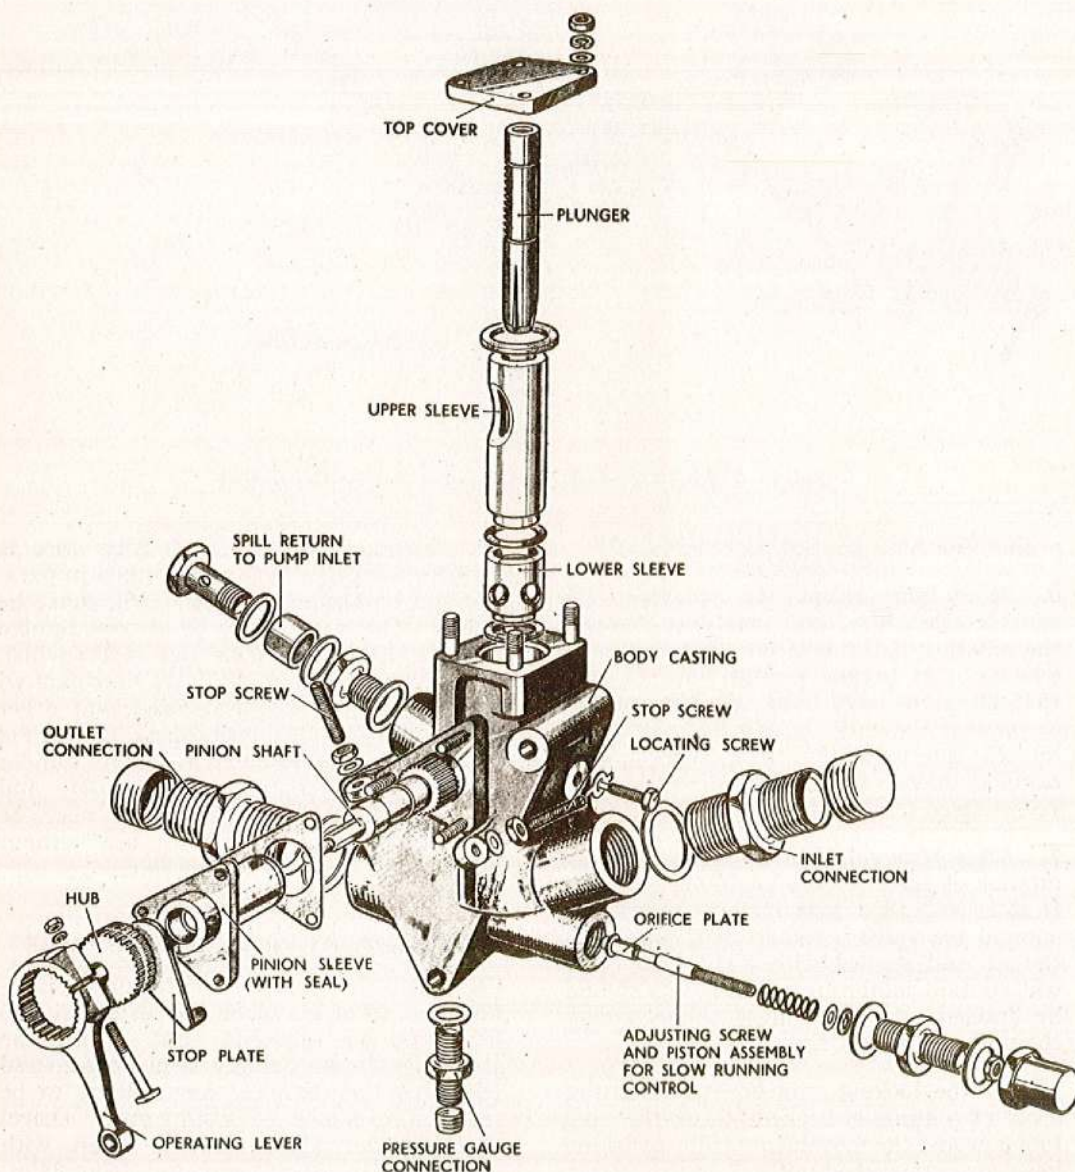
(a). T.V.B.1/4D throttle valve completely dismantled
